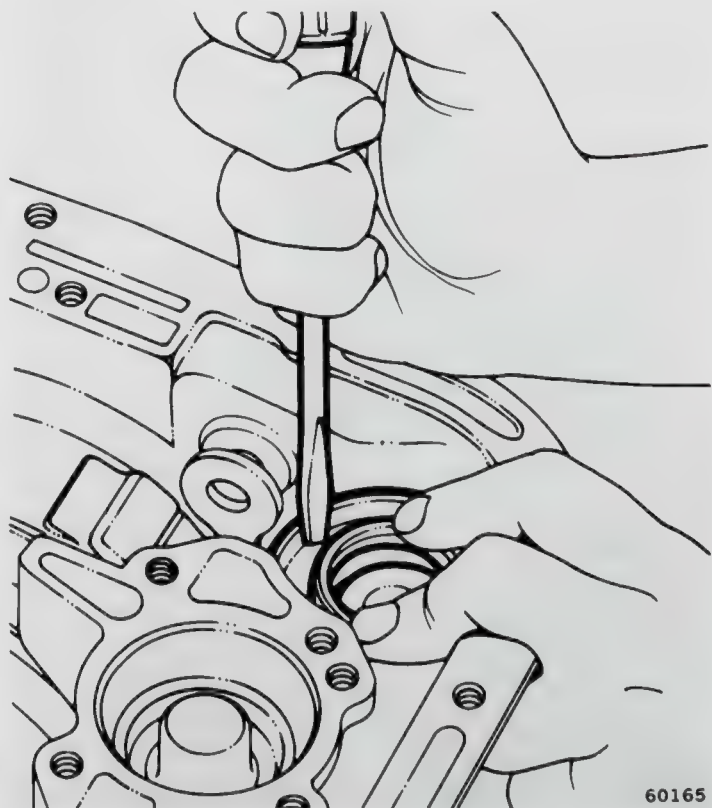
C-40 Rear Servo Spring and Snap Ring Removal
